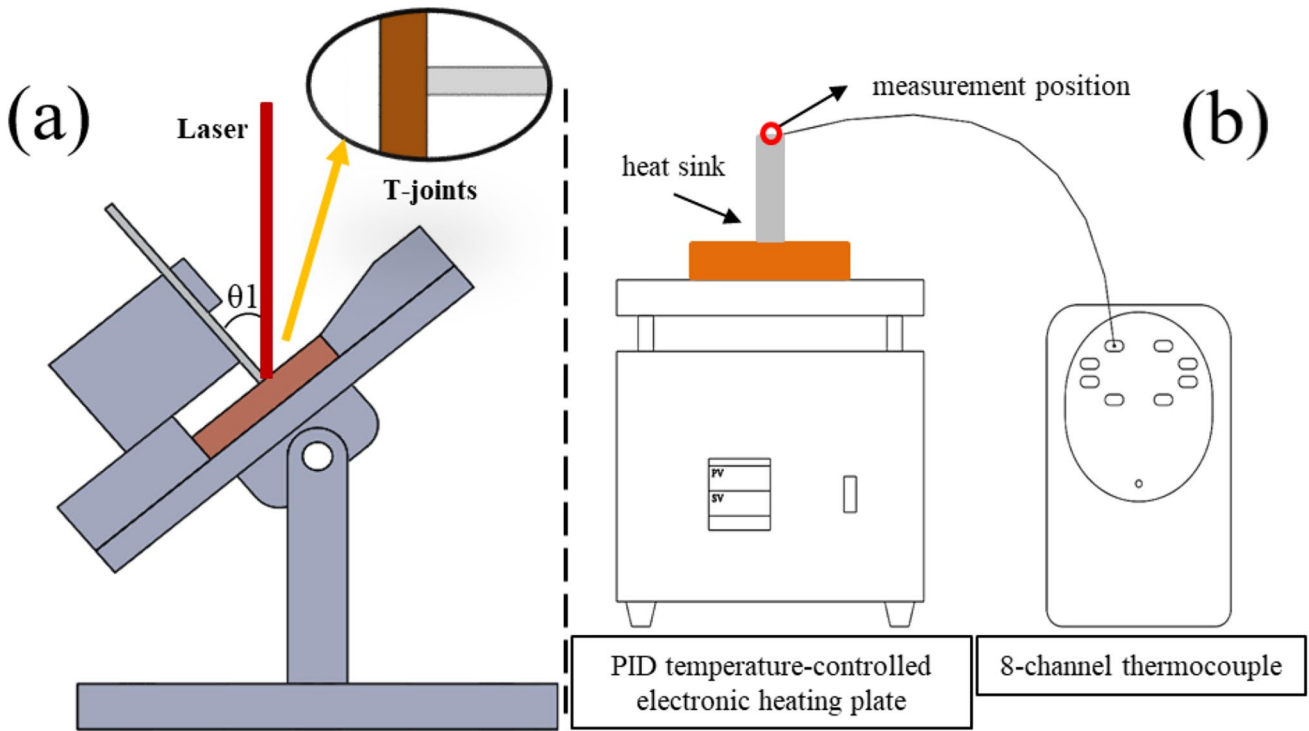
Schematic illustrations of: (a) T-joint laser welding fixture, and (b) thermal conductivity test setup
